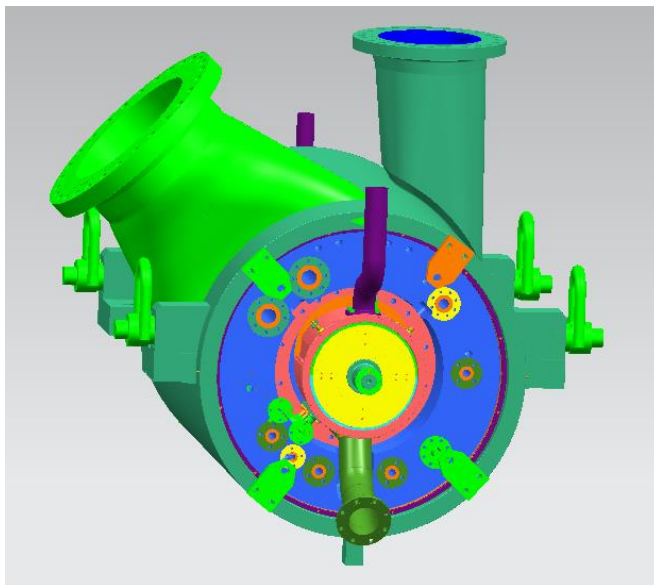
Pressure Case CAD Model (Inlet Nozzle at 45 deg, Discharge Nozzle Vertical)
